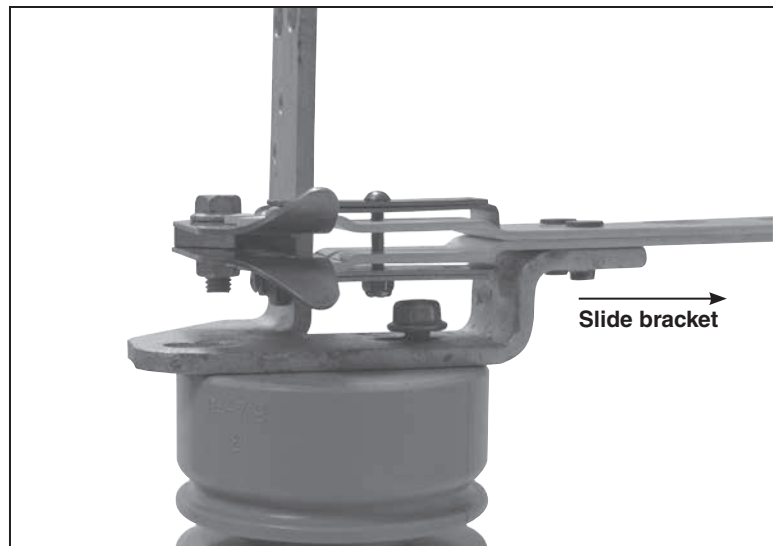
Slide the bracket until both holes align with the threaded hole on the insulator.
